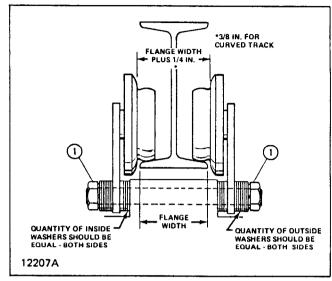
Sectional View of Trolley Showing Proper Wheel and Washer Spacing.
